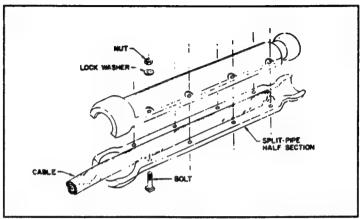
Split Pipe Stabilization (NAVFAC P-990 1978).
